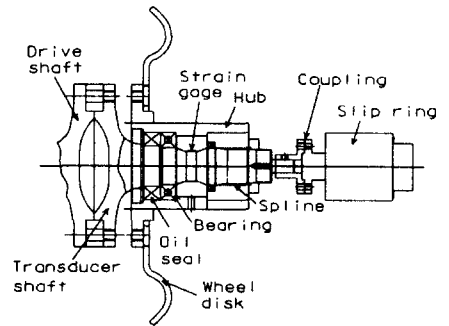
Wheel torque meter mounted on driving wheel shaft
